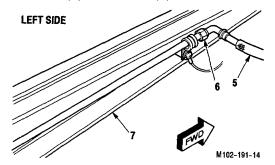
Tail Wheel Lock Actuator Hose Removal/Installation
